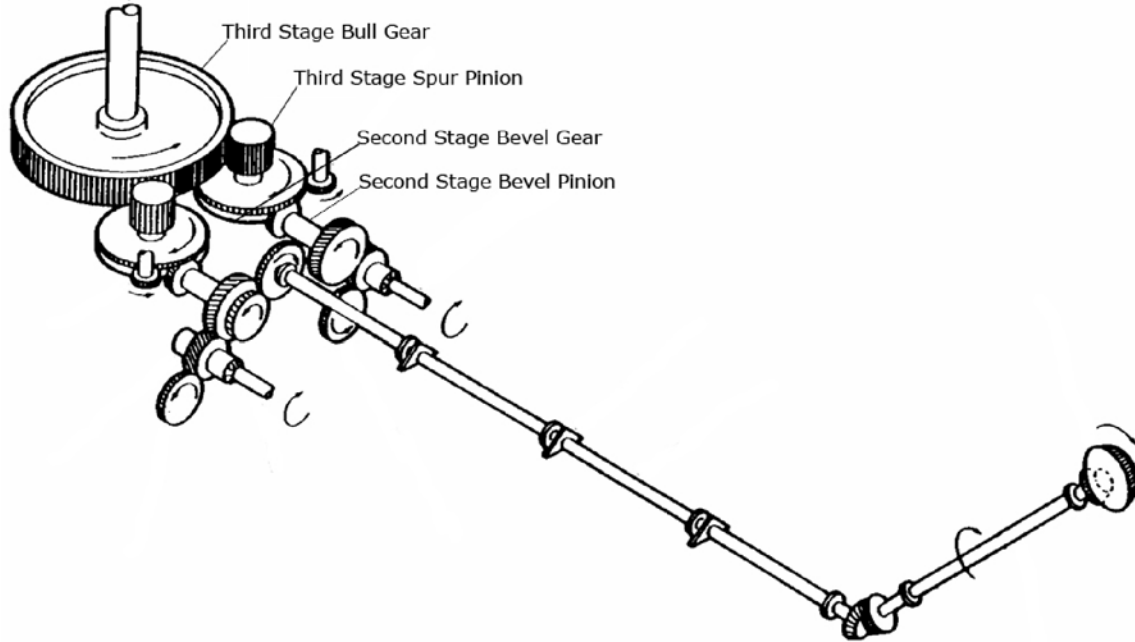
Schematic of an S-76C+ drivetrain which highlights the gears Superfinished during the project.
